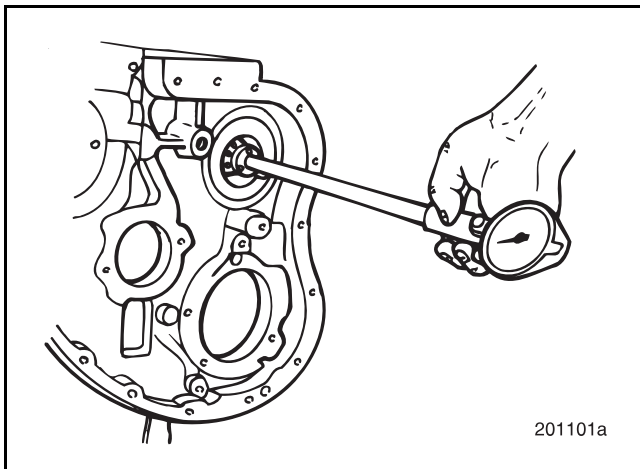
Auxiliary Driveshaft Bushing ID Check
